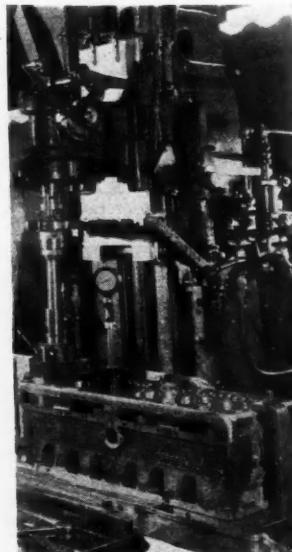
Cylinders are placed on locating dowel pins in a fixture of sliding plate index design which insures centralization of bores for honing
